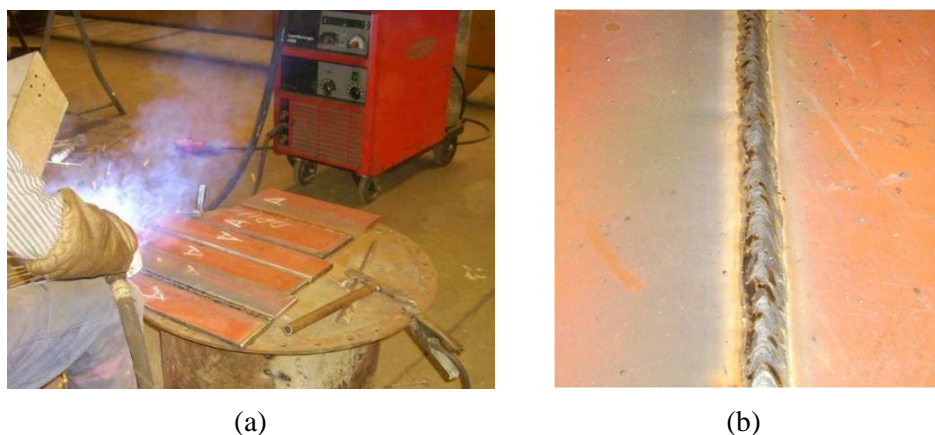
Welding process (a) and appearance of welded joint (b).
